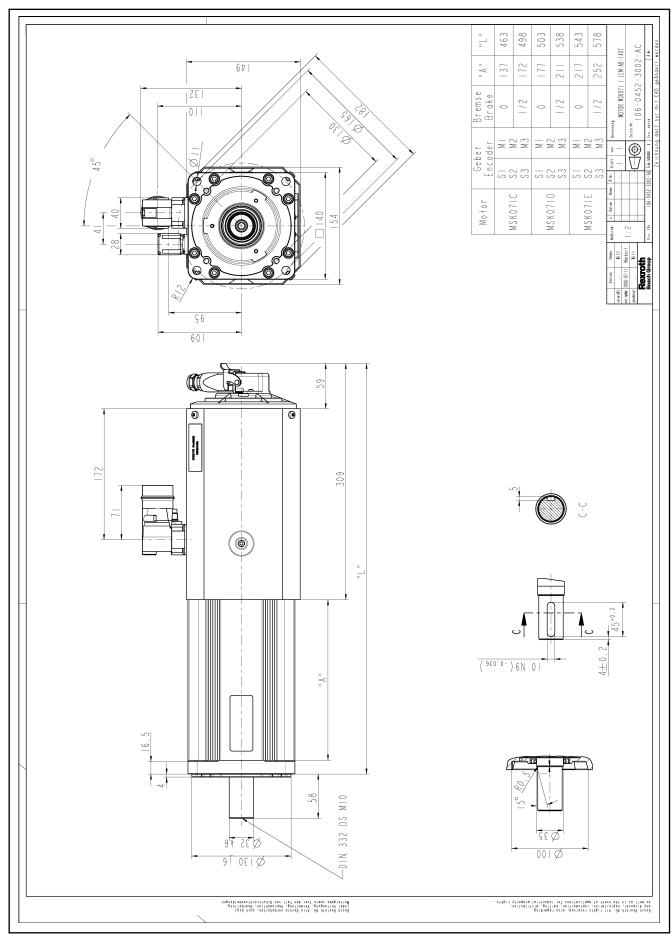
Dimension sheet MSK071 with axial fan unit
